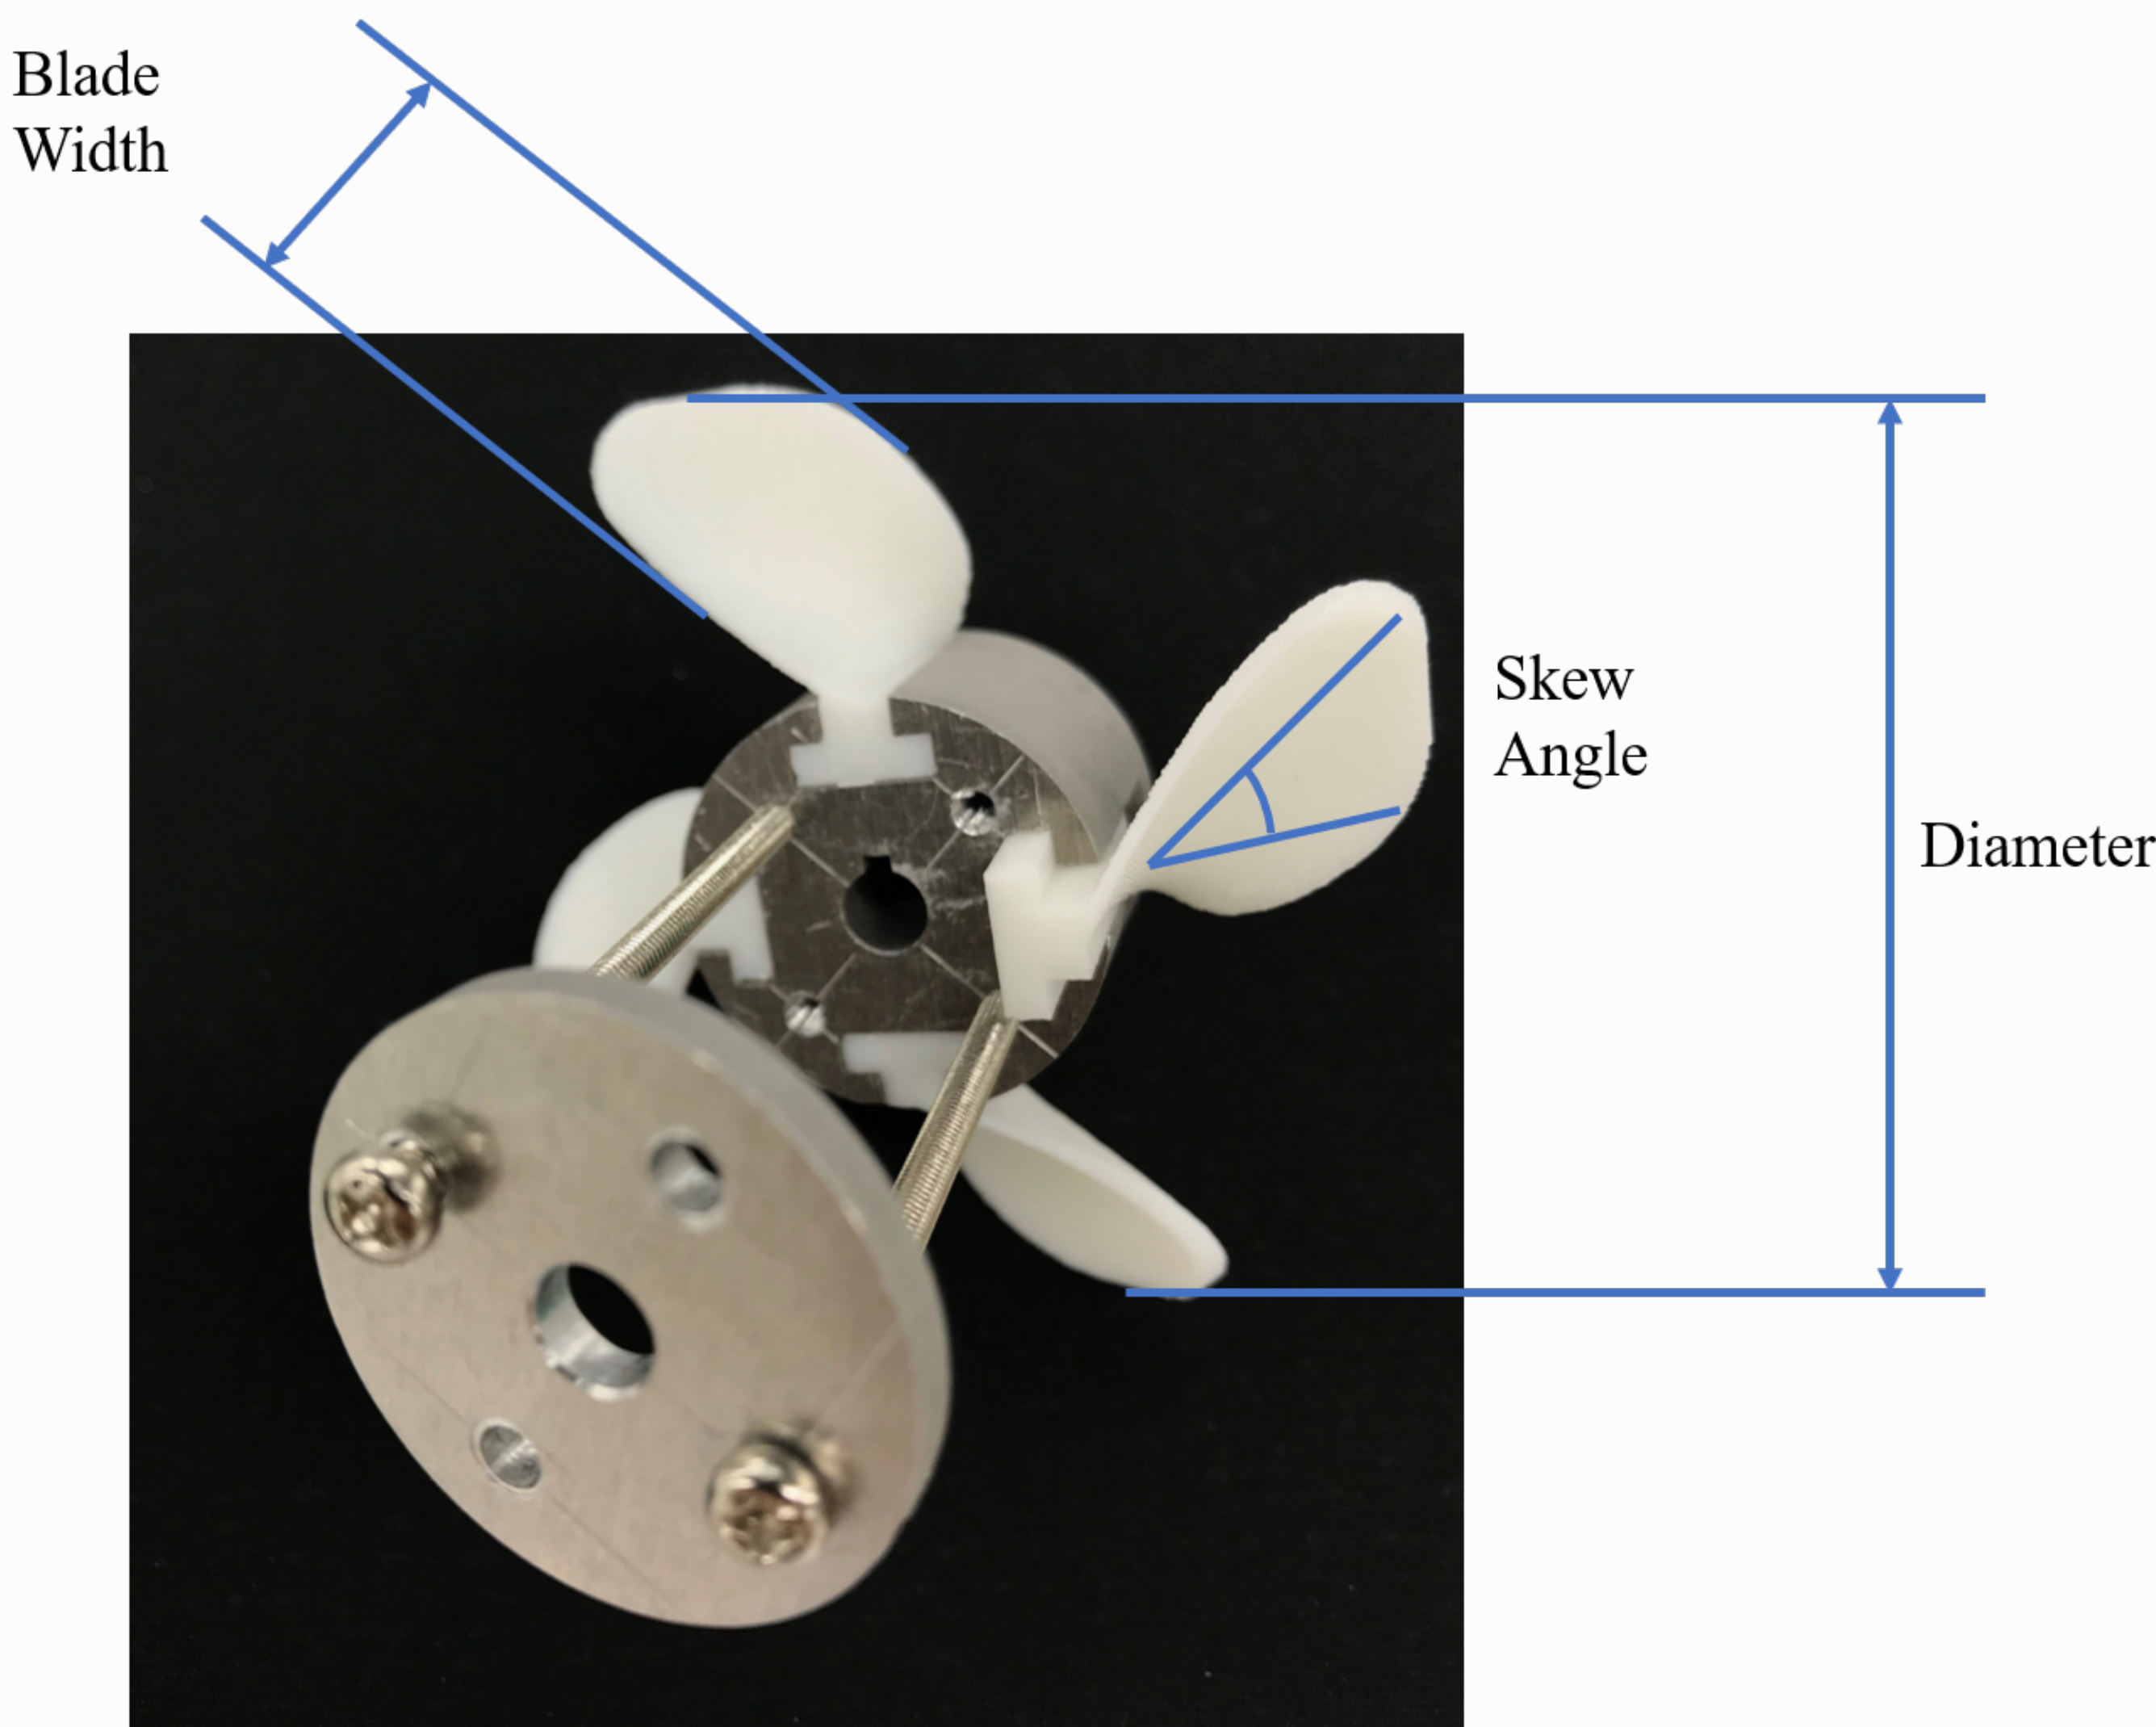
The 3D CAD models of the propeller blades inserted to the boss
